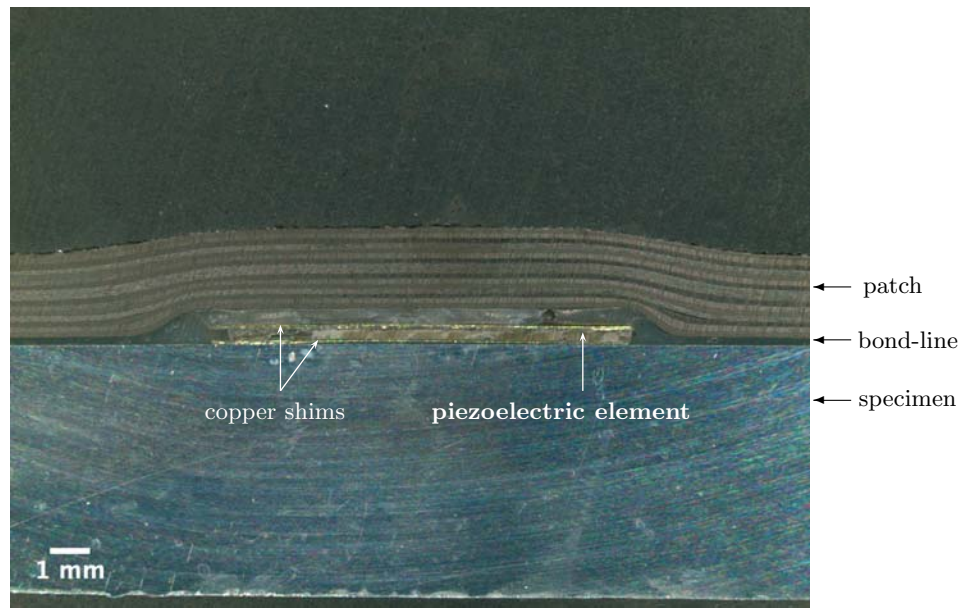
Sectioned view of reinforced coupon showing bond-line structure adjacent to embedded piezoelectric element.
